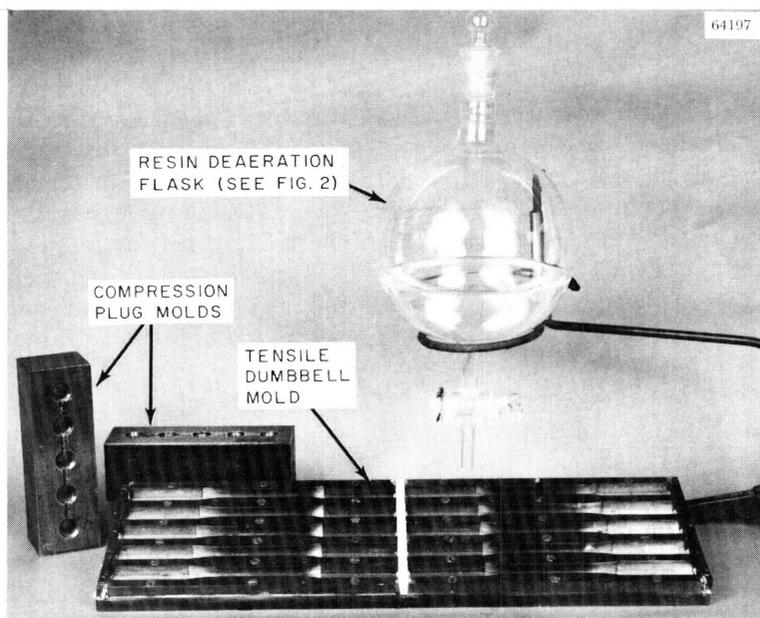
Apparatus and molds used for casting epoxy tensile test dumbbells and compression plug test specimens
